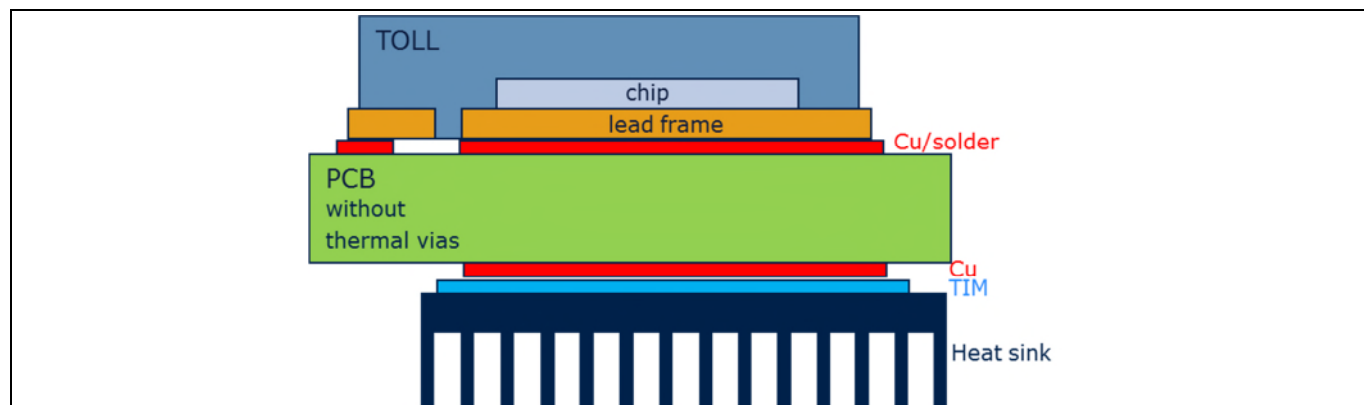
Schematic PCB assembly for TOLL on 2 layer FR4 board
